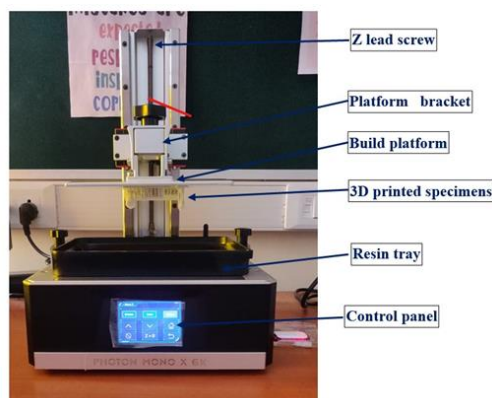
Depicts a resin 3D printer & its components during the fabrication process
